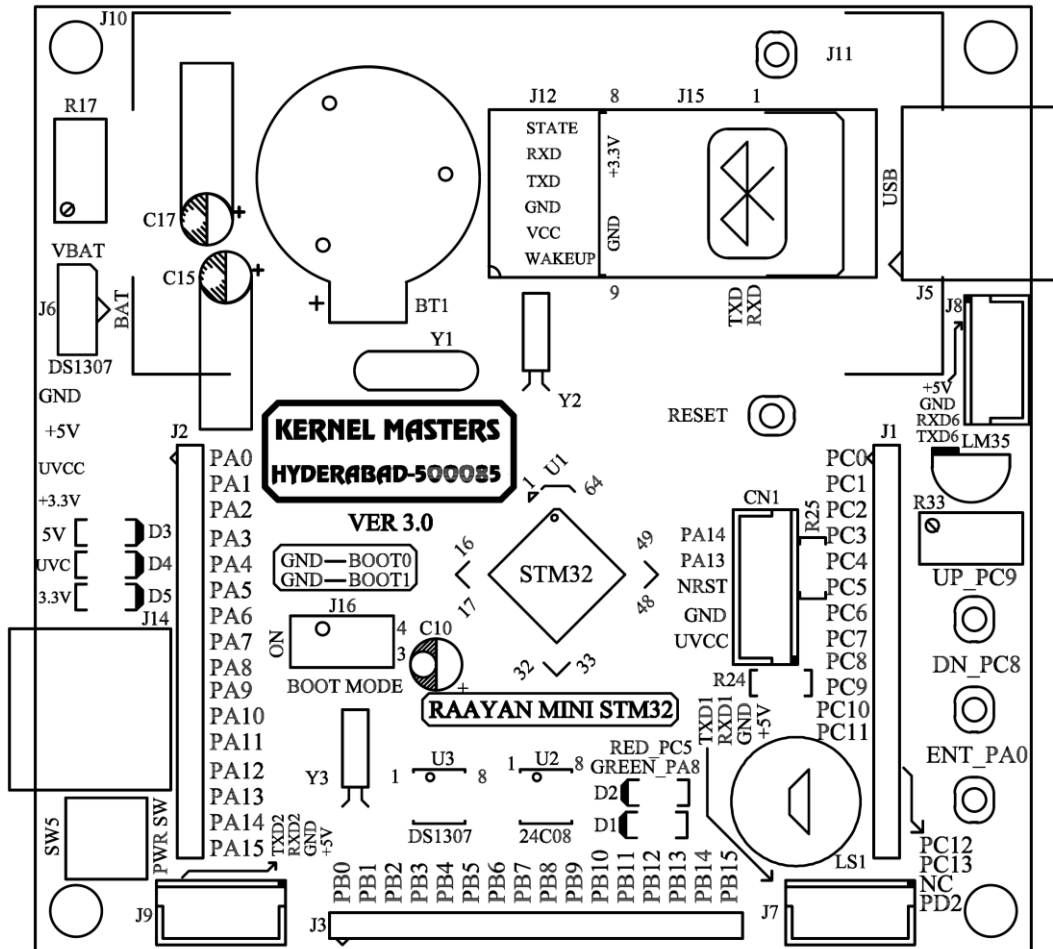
Raayan Mini STM32F4 Development Board Component Locations (Bottom View)
